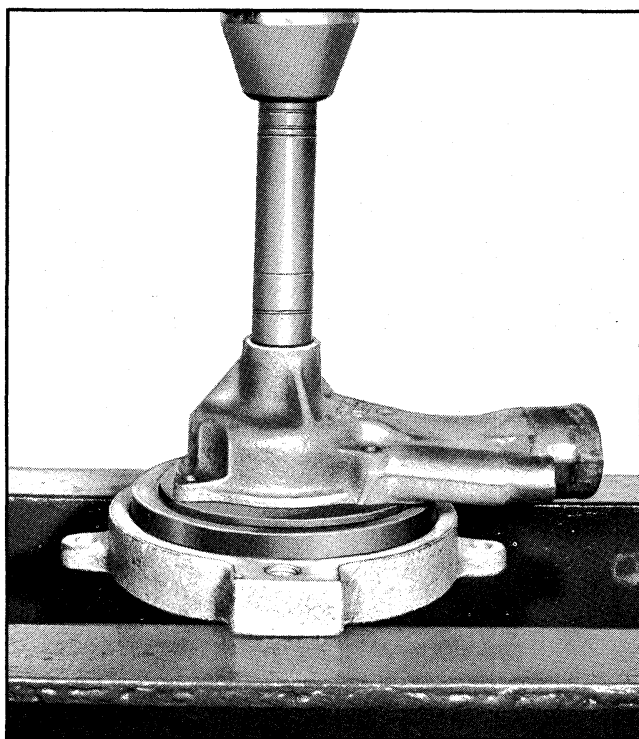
A-23 Pressing Pump Shaft and Bearing Into Pump Body Bearing Bore
